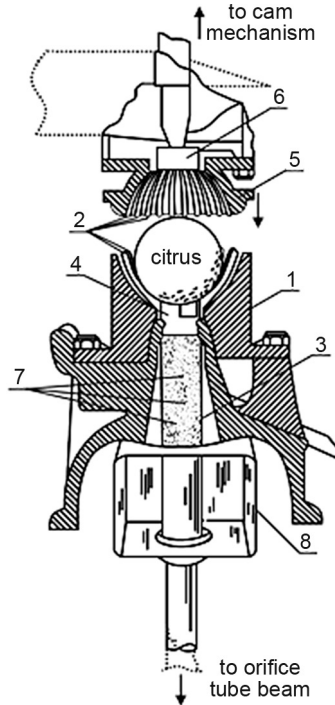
Schematic diagram of an FMC extractor: 1 – lower part of the extractor, 2 – metal pins, 3 – juice drainage tube, 4 – sharp cylindrical knife, 5 – upper part of the extractor, 6 – knife, 7 – holes in the juice drainage tube, 8 – storage tank [63–65]
